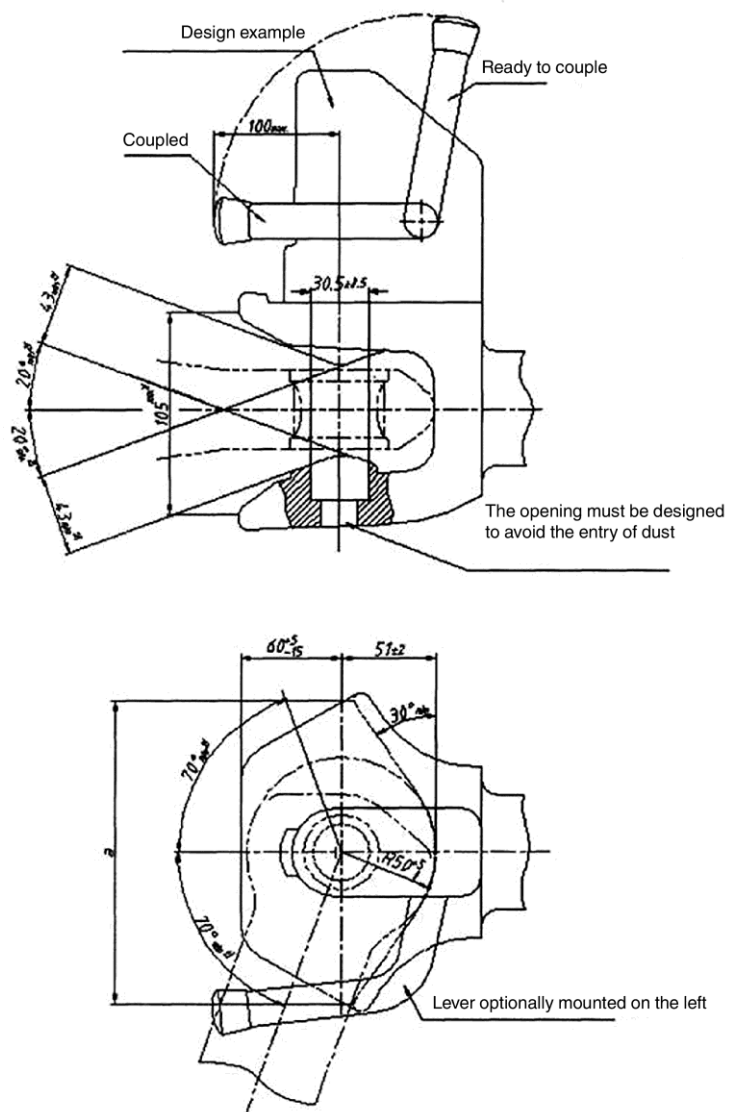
Automatic trailer coupling, with cylindrical locking pin
